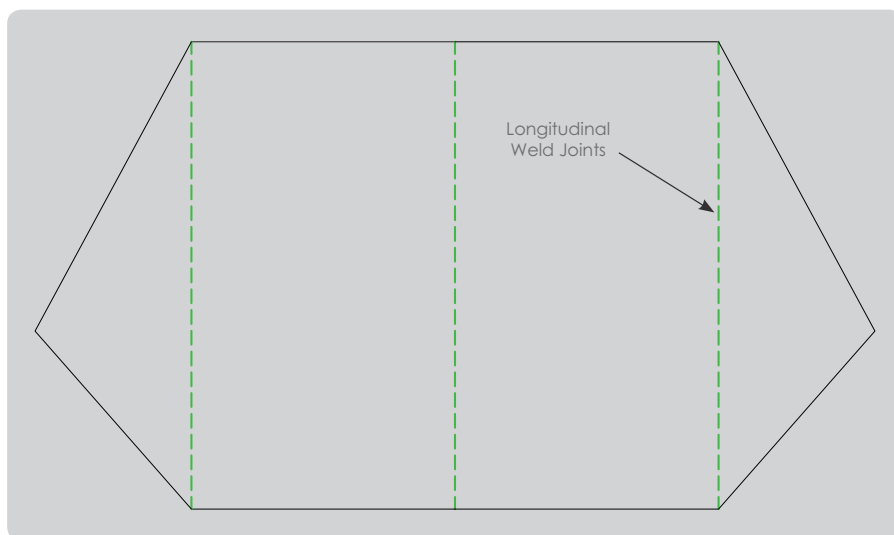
Mixing chamber plates longitudinal K-TIG welded joints prior to rolling (dashed lines)
